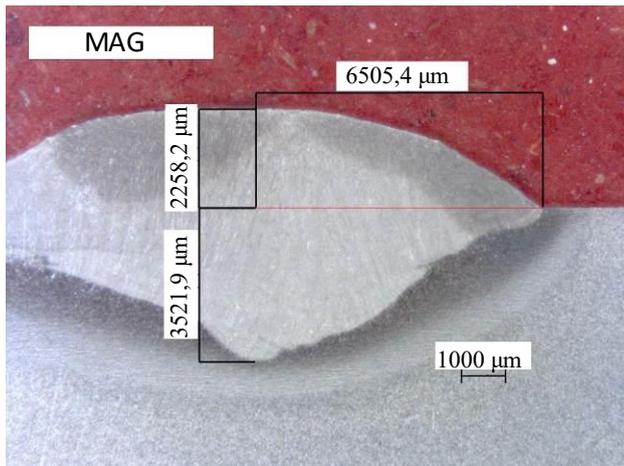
Weld cord without addition of cold wire in the melt pool
